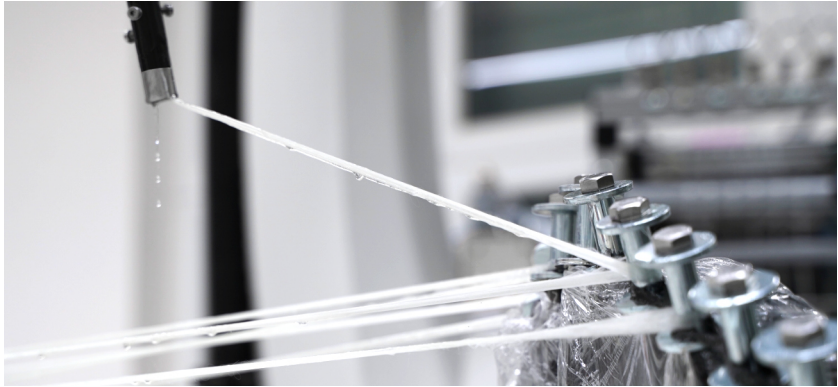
Nozzle (left) of a winding head spanning an impregnated glass fiber bundle after hooking it to a winding pin (right), illustrating the CFW process.
